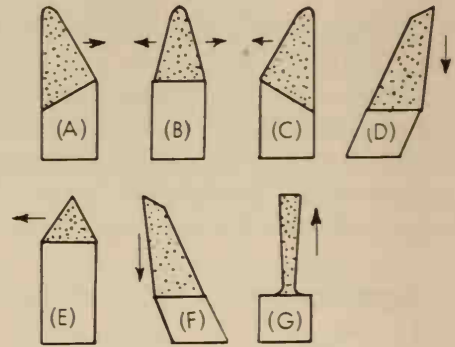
Common lathe cutting tools. (A) Left-hand turning tool; (B) Round-nose turning tool; (C) Right-hand turning tool; (D) Left-hand facing tool; (E) Threading tool; (F) Right-hand facing tool; (G) Parting or cut-off tool.
